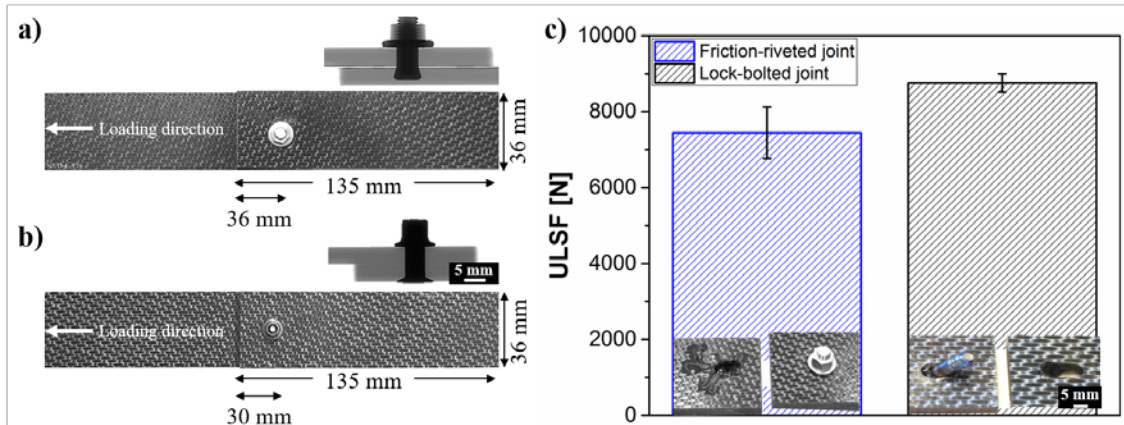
~~Illustration of~~ lap-shear specimen geometry for a) friction-riveted and b) lock-bolted joints; c) comparison of the lap-shear strength between friction-riveted and reference joints (~~reference joints~~ produced in the work of [5]).
